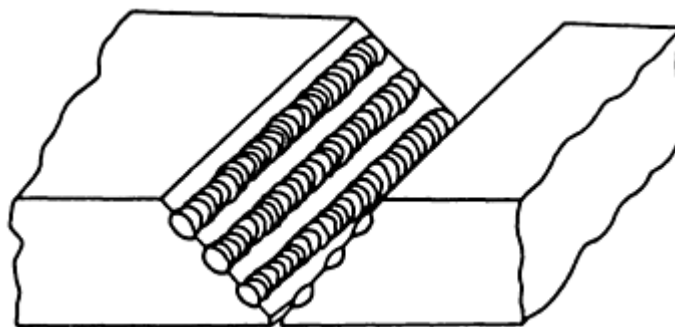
GROOVE FACE GROOVING FOR WELDING OF CAST IRONS. SOURCE: REF 1
